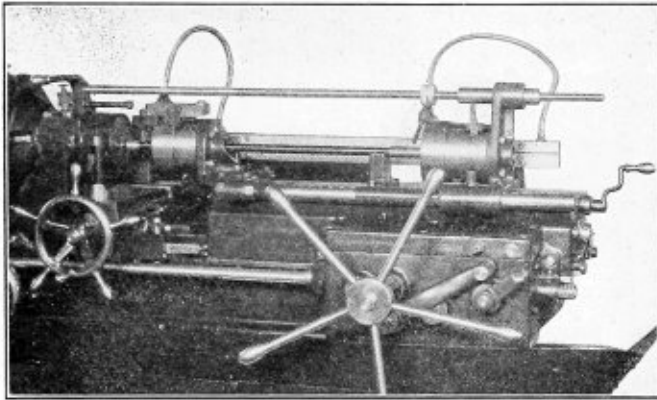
Model B Equipment for Turning and Threading Crown Stays
